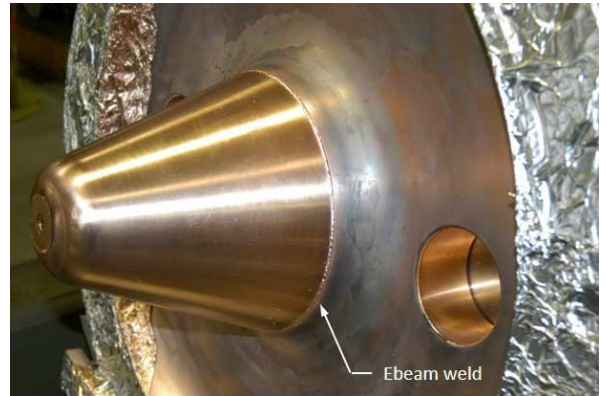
Cathode end cap and nose after Ebeam welding.
